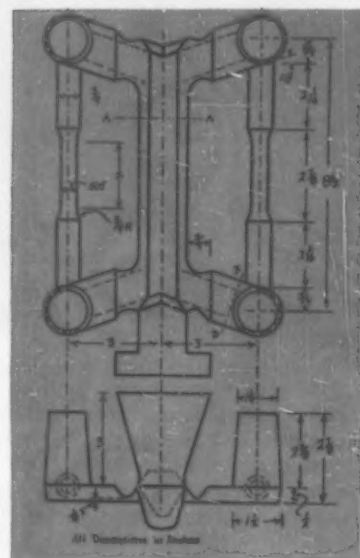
Design and dimensions of aluminum double bar casting.
